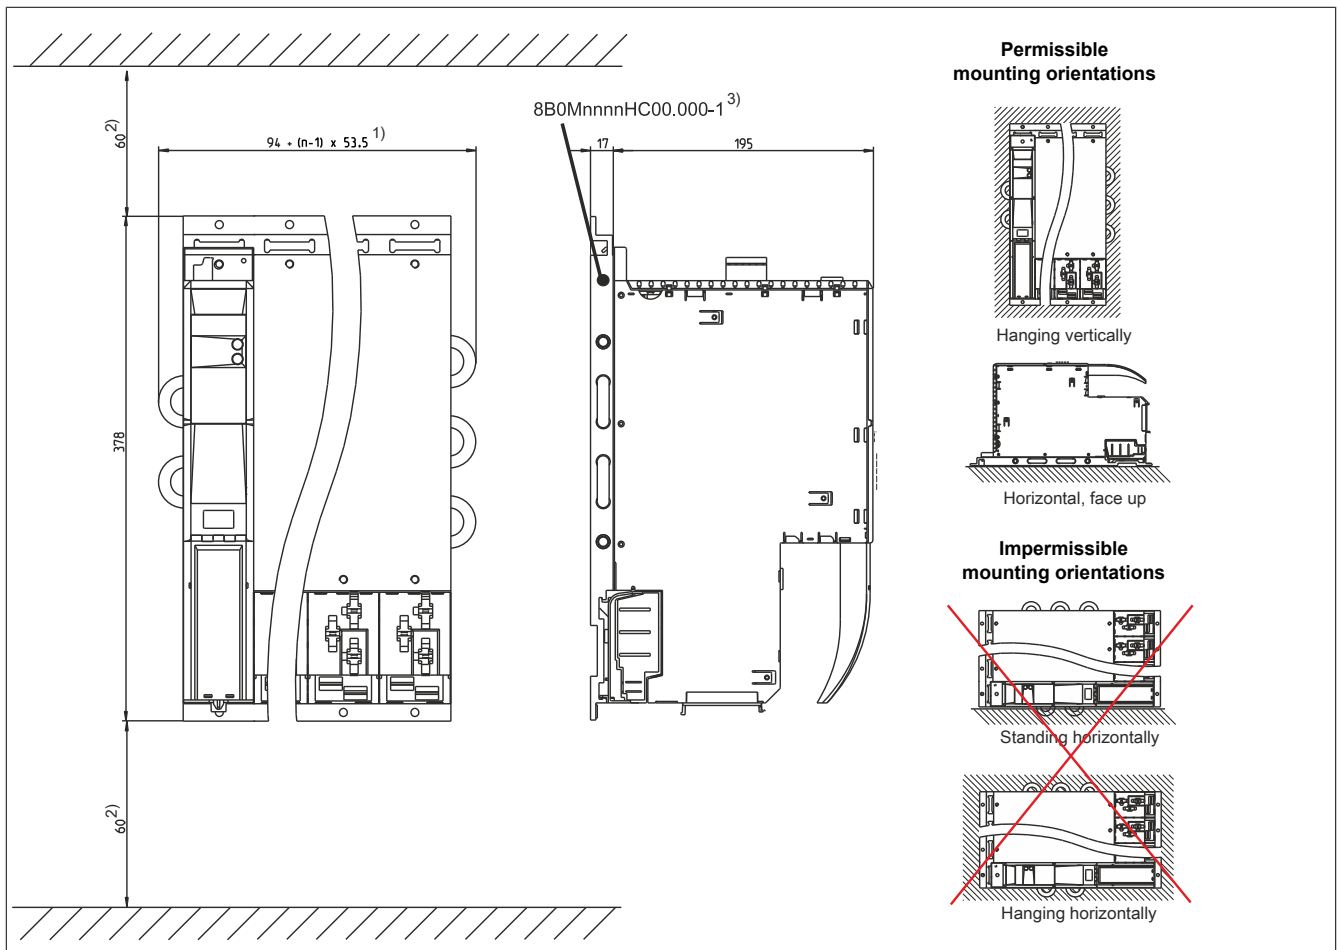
8B0C0320HC00.B00-1 - Dimension diagram and installation dimensions
